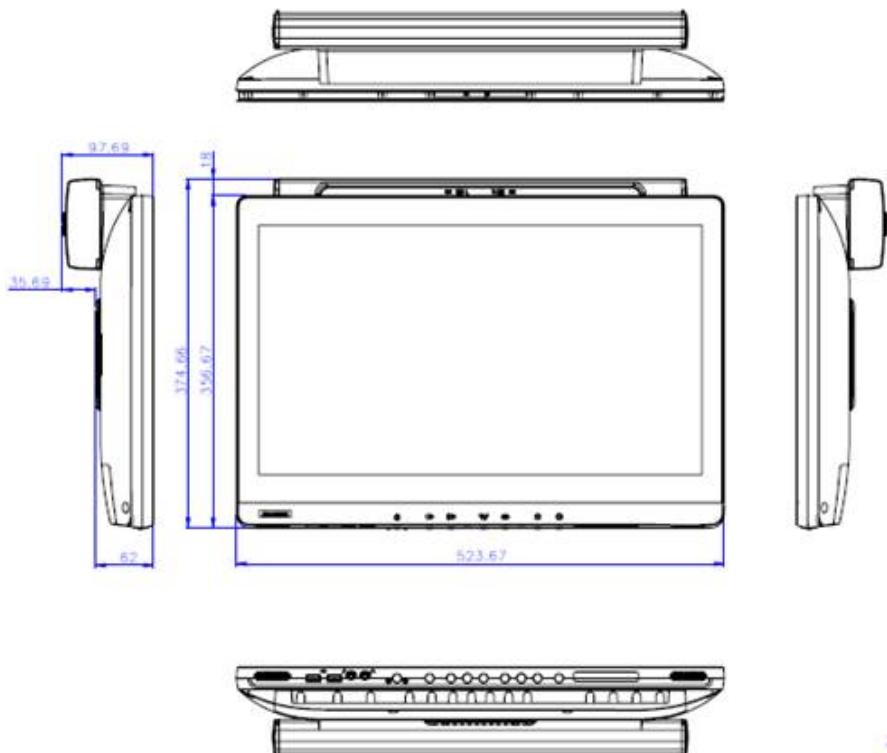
POC-621 Hot Swappable Battery Pack Dimensions
